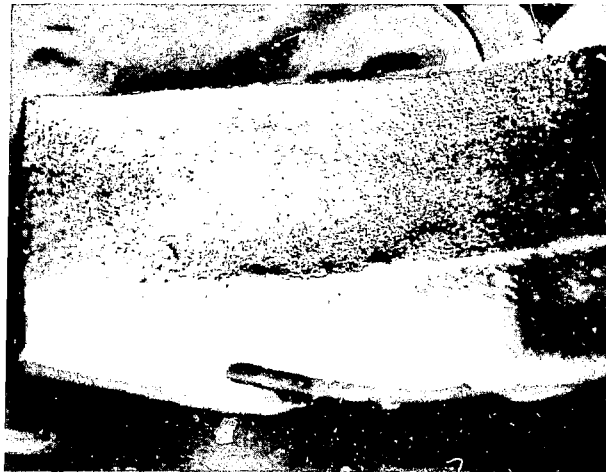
Severe internal cracking present at the reverse bend in capsule SR-107, 6X.
